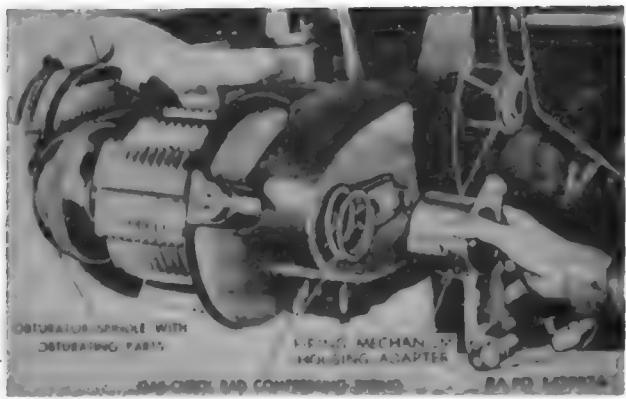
Removing or installing firing mechanism housing adapter, gas-check pad compressing spring, and obturating parts.
